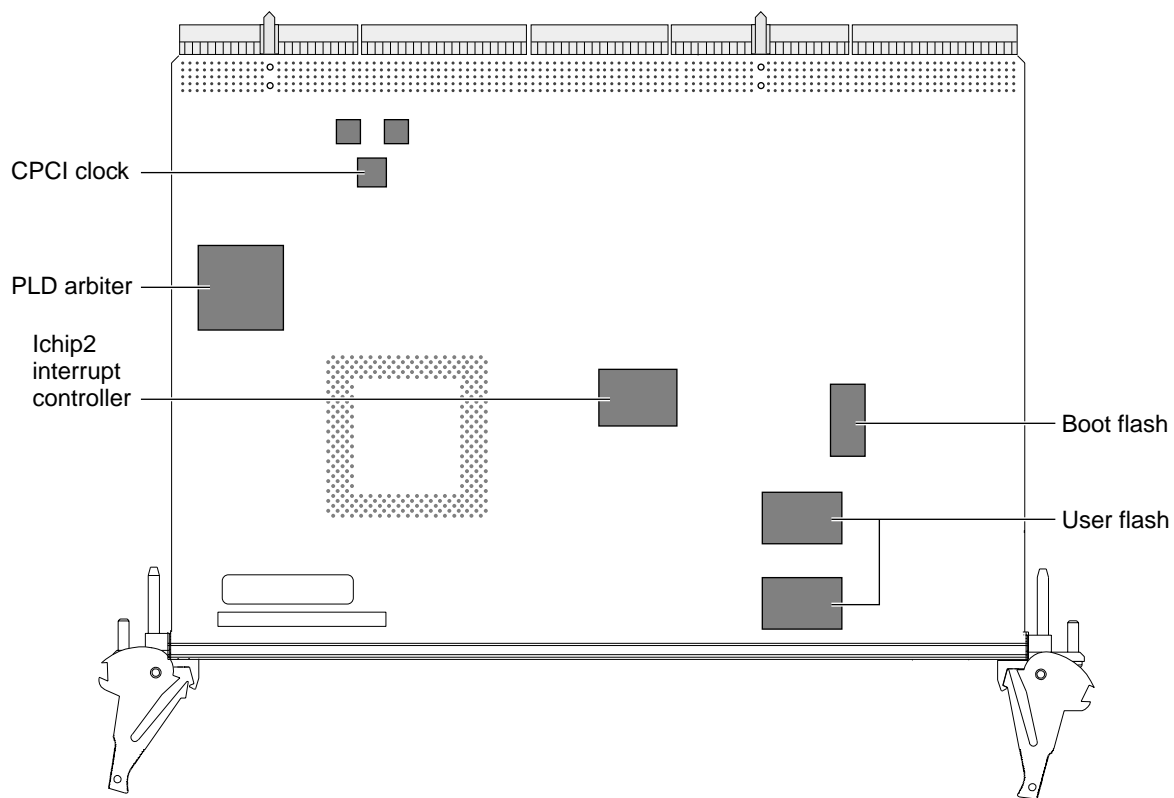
Solder Side of the Netra CP2140 Board
